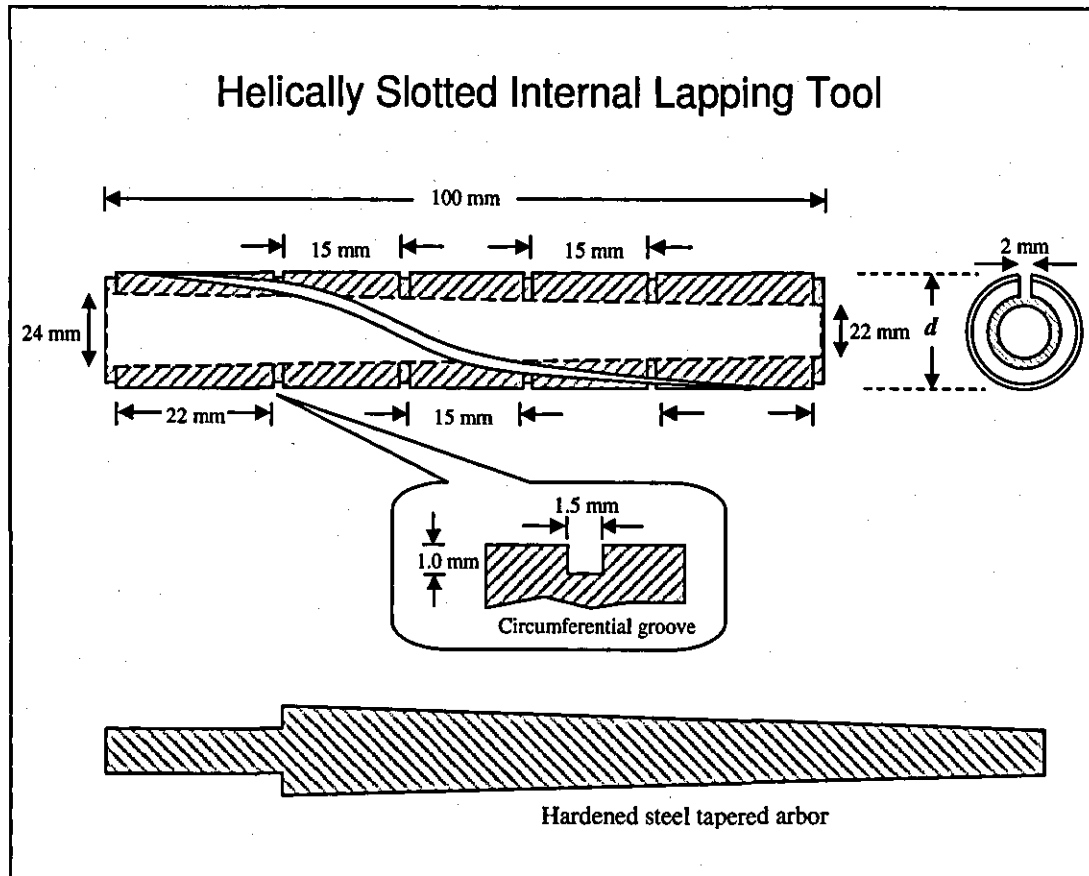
Internal lapping tool used in trimming and matching of a cylinder blank
